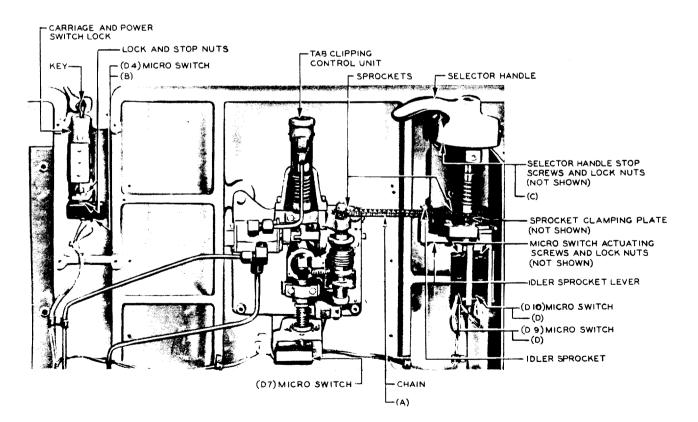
659A and 659D Tools (partial view of front underside of table)
